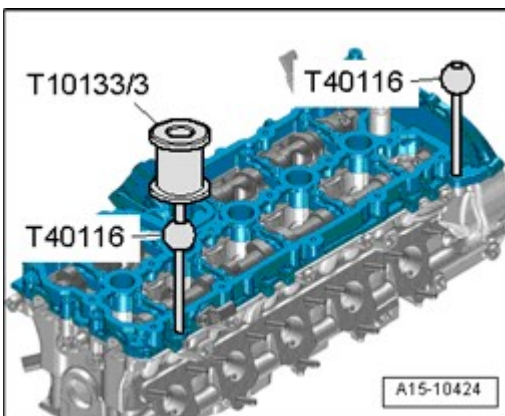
Removing Locating Pins T40116 Using Impact Puller T10133/3
